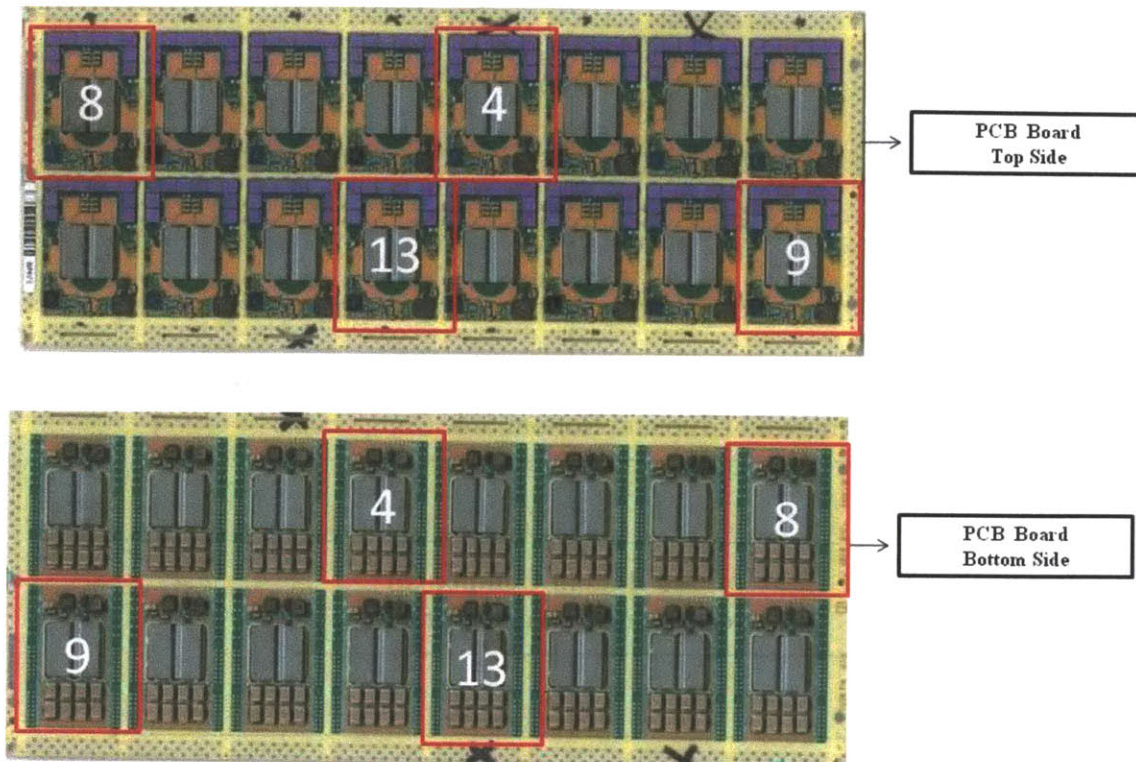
Experiment test board: V.I Chip-TV-36372
